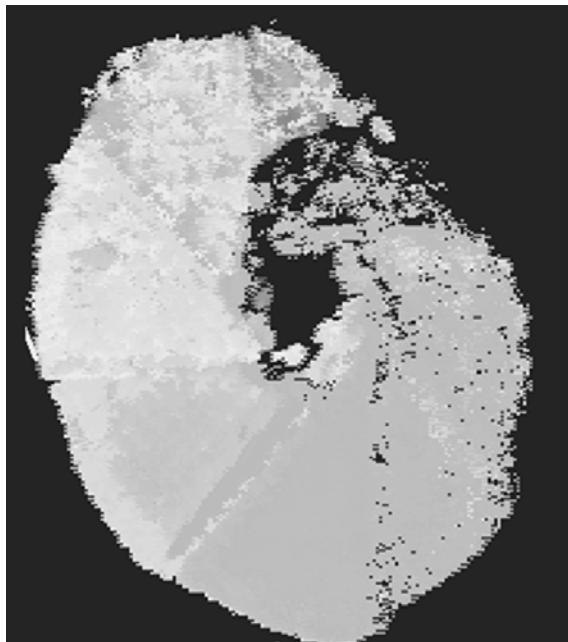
C-Scan image for Sp6 damage before fatigue testing.
